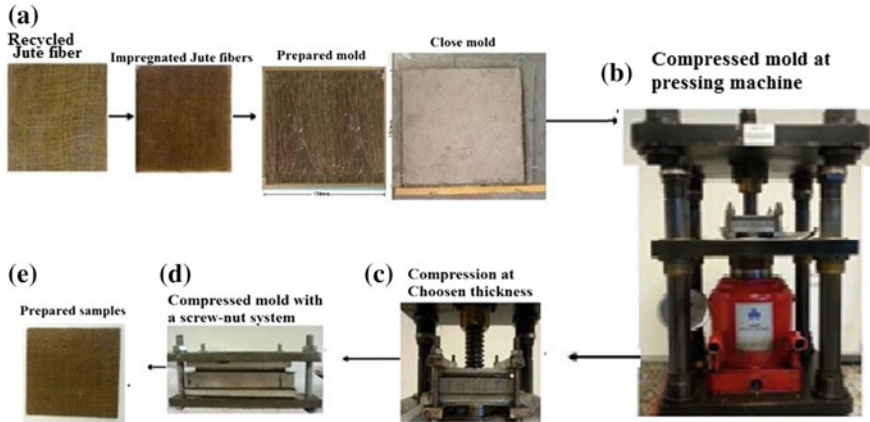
a Processing jute fiber and molding. b Compressed mold at pressing machine. c Compression at chosen thickness. d Compressed mold with screw-nut system. e Prepared samples
